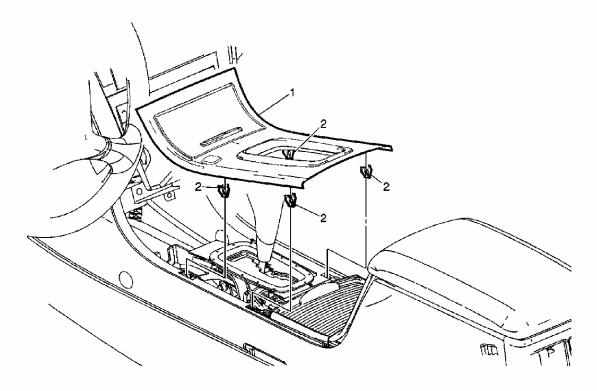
Removing/Installing Trim Plate - Front Floor Console Courtesy of GENERAL MOTORS CORP.
